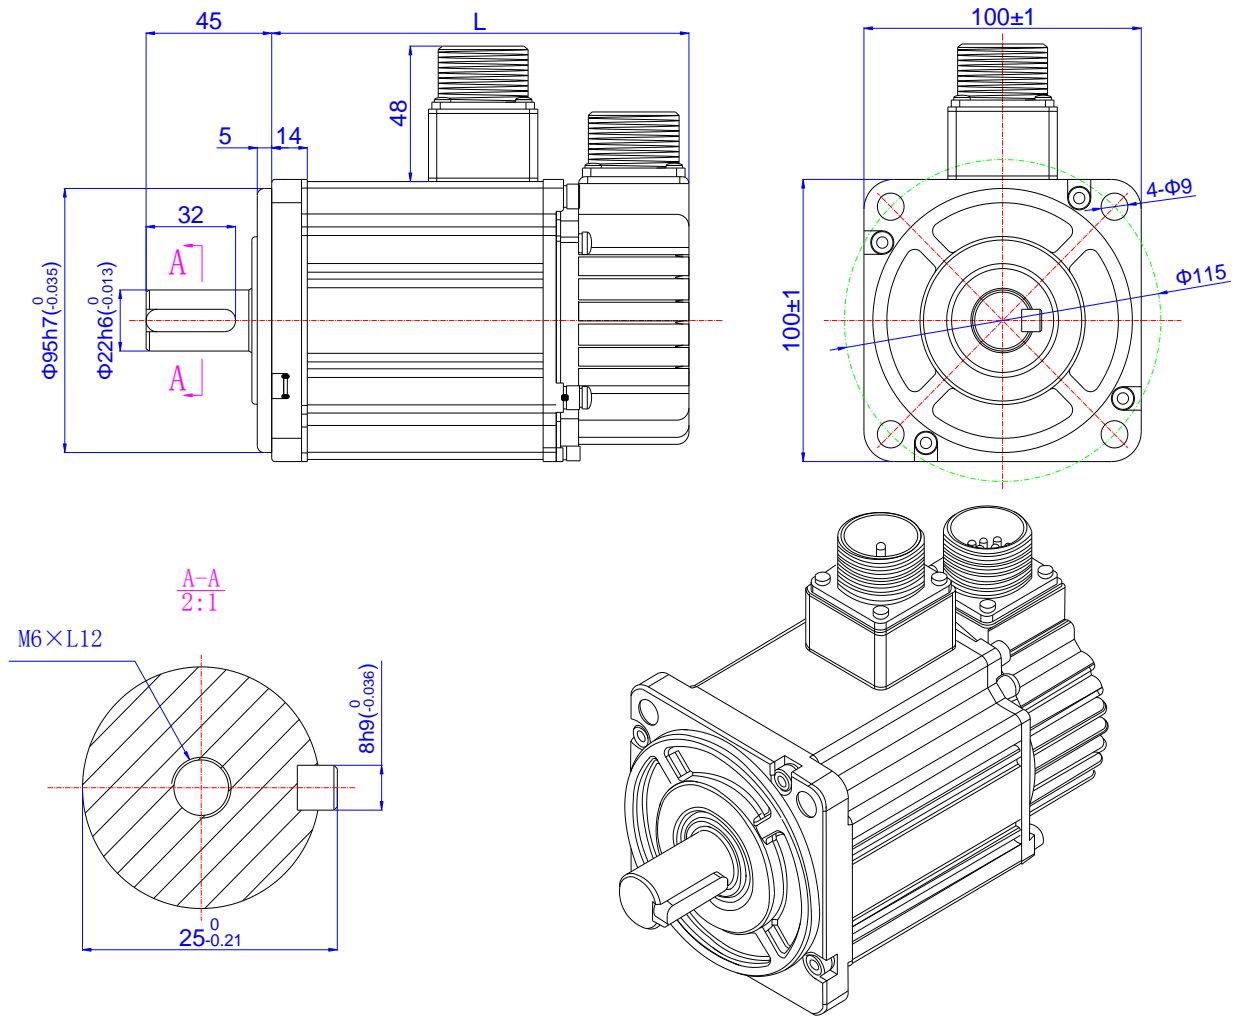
Outline dimensional drawing of MB100-DA4032F-F□□□□□
